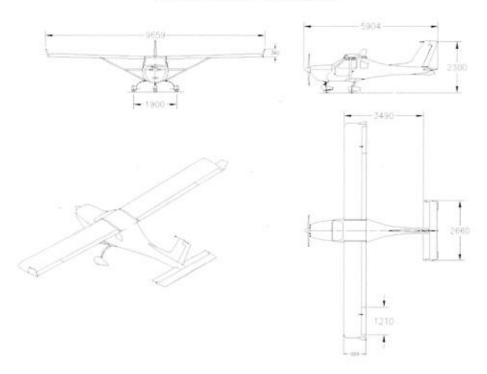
Three View Drawing of the J170-D Note: All dimensions in millimetres
